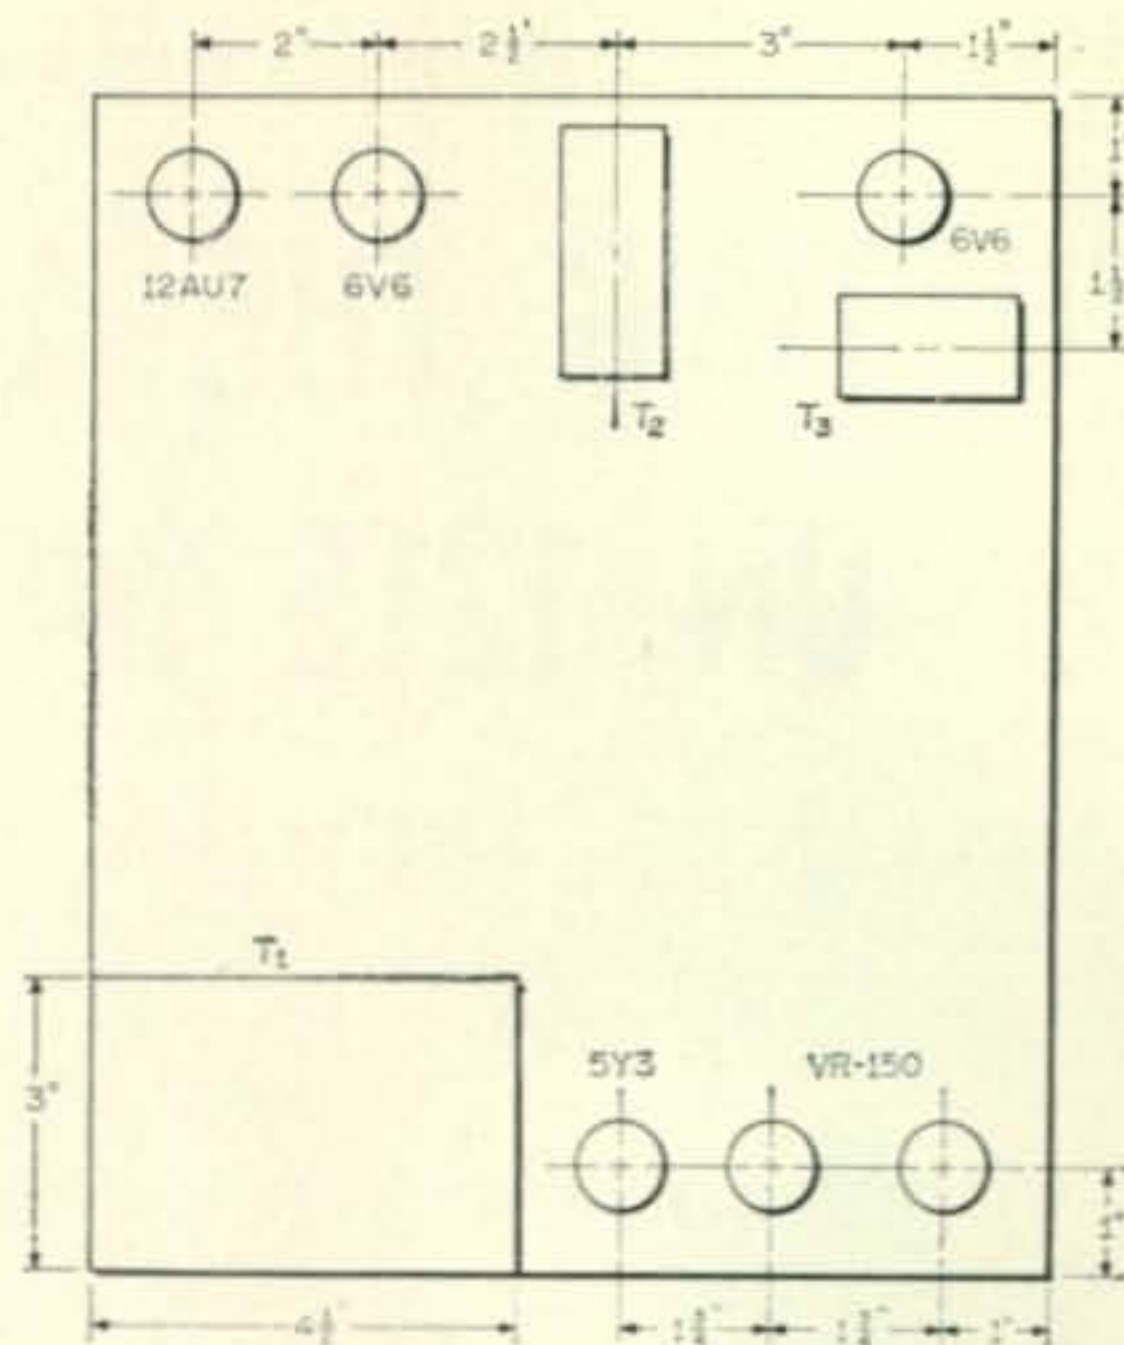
Layout of the chassis containing the modulator and power supply section. This layout should be followed closely so that the chassis will fit in behind the front panel of the APX-6 when completed.
